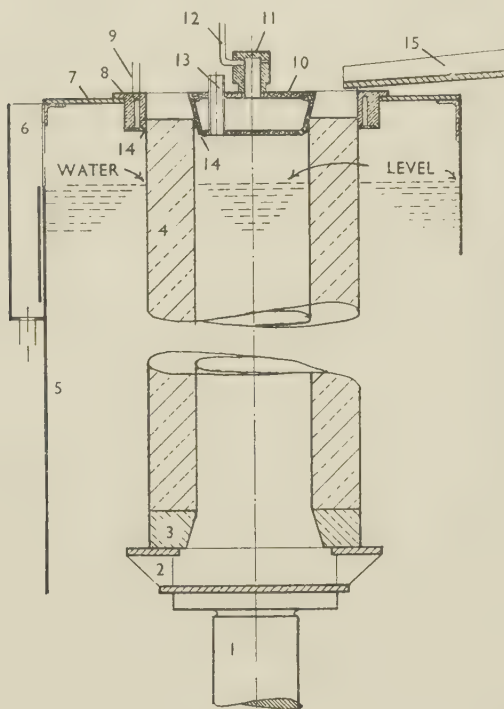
Equipment for Direct-Chill-Casting a Hollow Billet 20 in. in Outside Dia. \times 10 $\frac{3}{4}$ in. dia. Bore.
